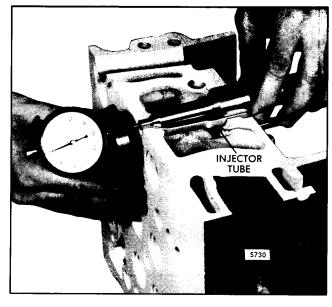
Measuring Relationship of Bevel Seat in Injector Tube to Cylinder Head Fire Deck using Tools J 22273 and J 25521
